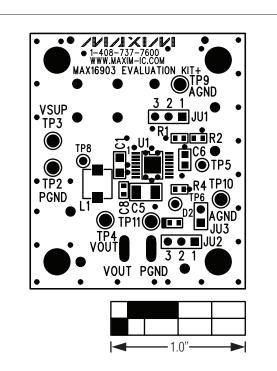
MAX16903 EV Kit Component Placement Guide— Component Side
